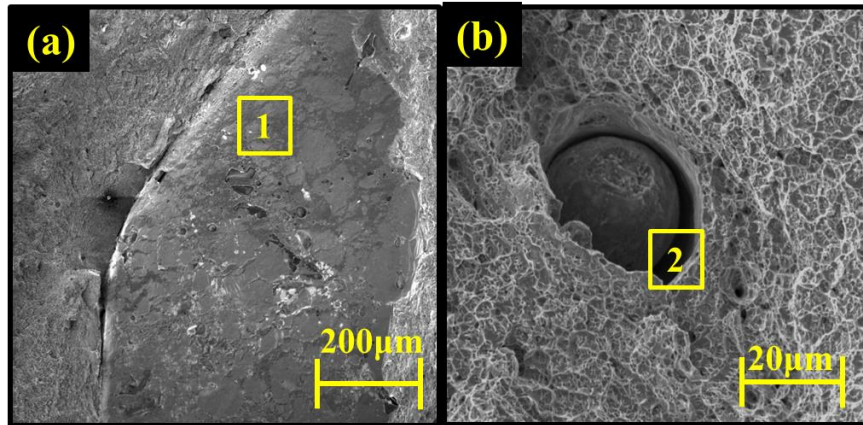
(a) Unfused SLM layer (label 1) and (b) Delaminated layer between the powder particle and the material matrix (label 2) on the fracture surface of sample 17B (213.2 J/mm). This sample fractured in the weld HAZ.
